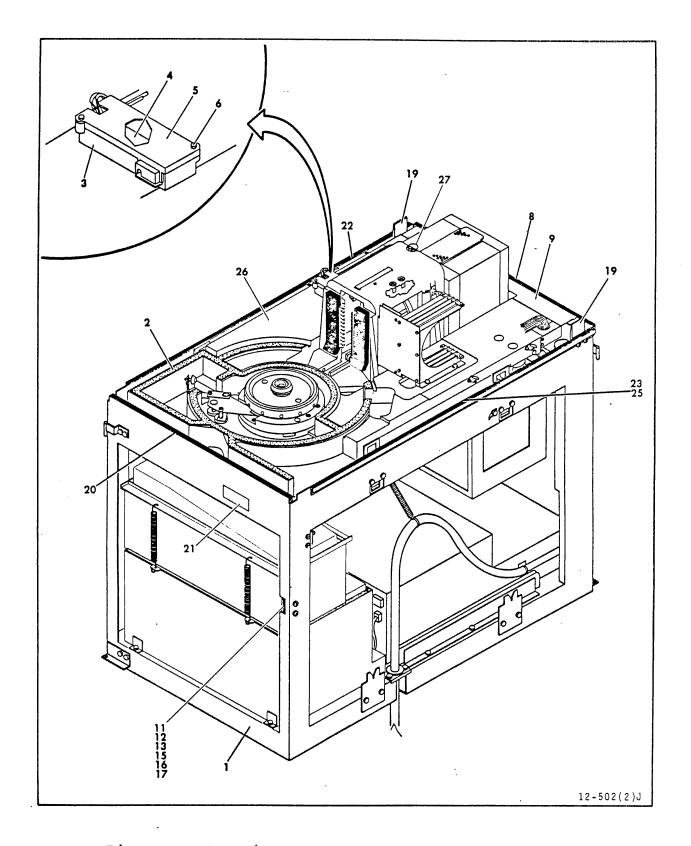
A-5. Final Frame Assembly (Sheet 2 of 3)
